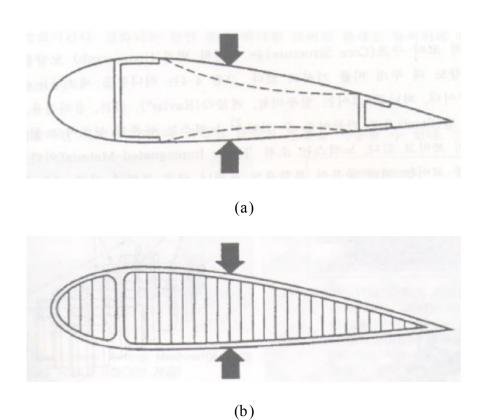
(a) Metal skin will bend and flex when forces are applied in flight. (b) Composites keep the structure foam flexing in flight, eliminating fatigue.
